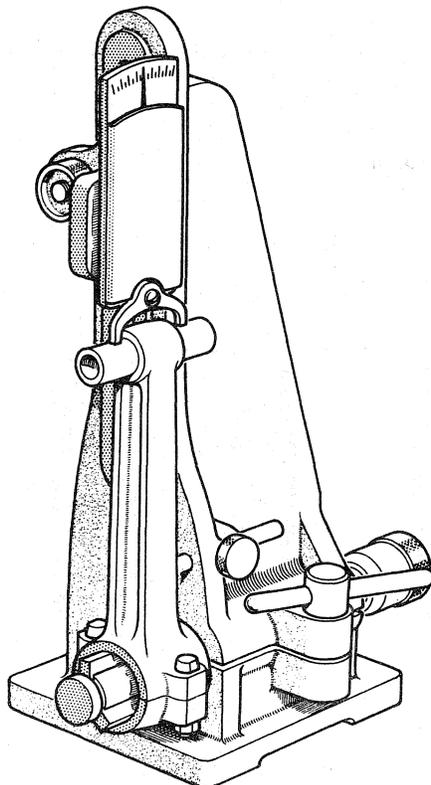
CONNECTING ROD ALIGNMENT GAUGE
